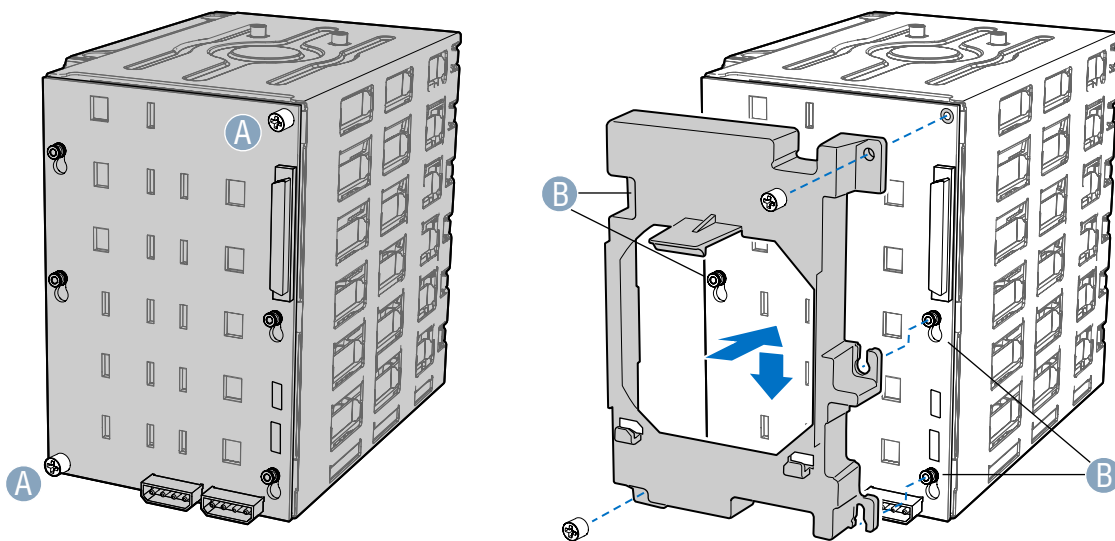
Attaching Drive Cage Bracket to Drive Cage
